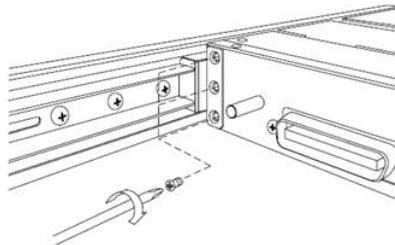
Connecting Three Flat Screws to the Rear of the Console
